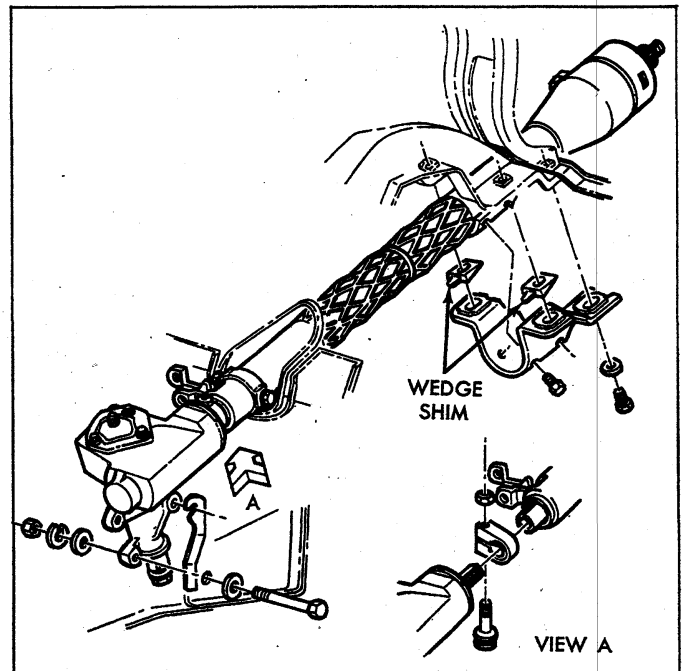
Instrument Panel Mounting Bracket—Chevy II
